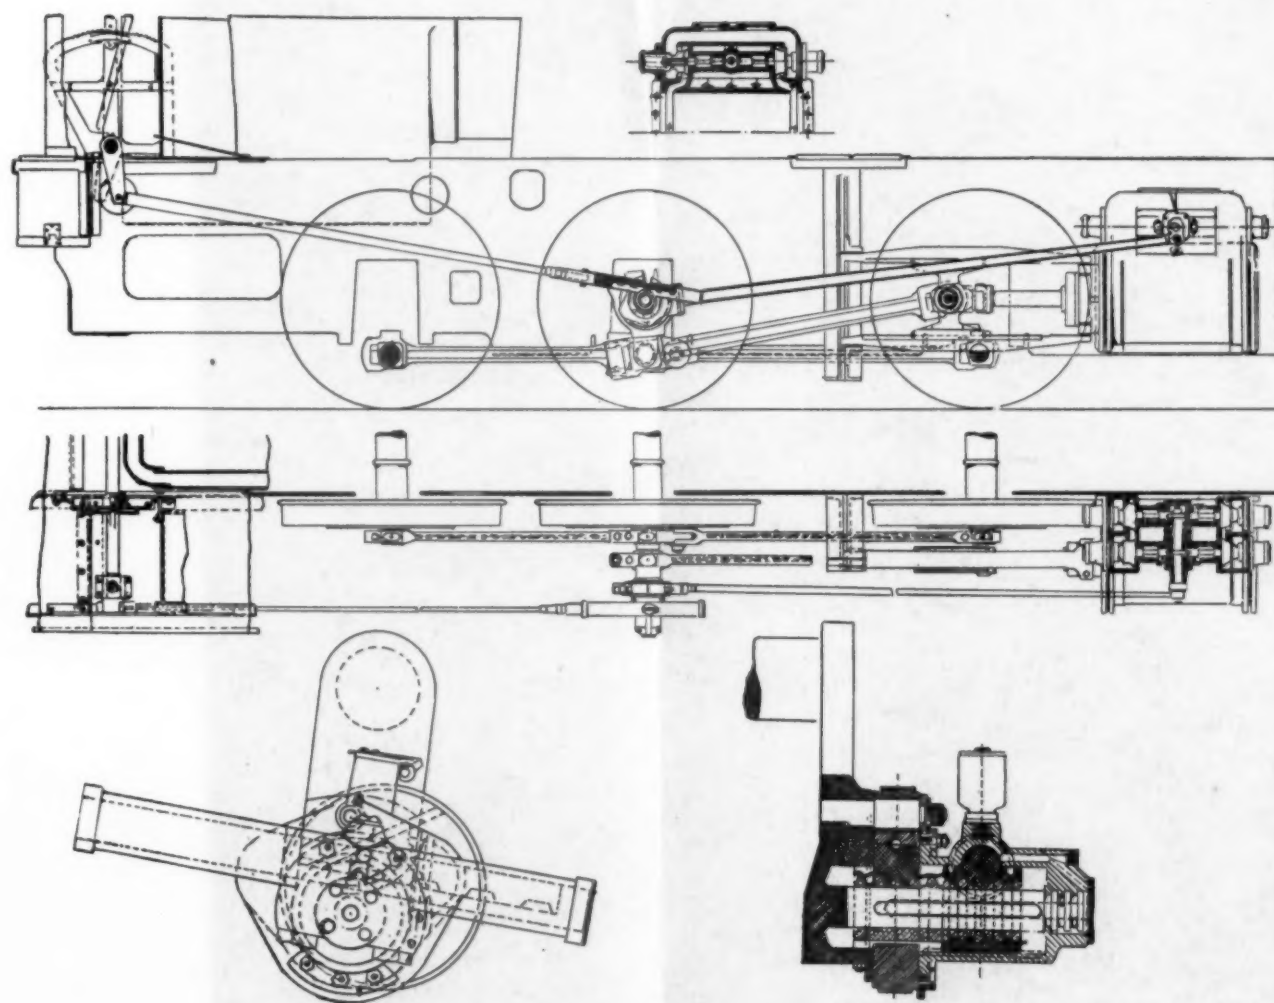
LENTZ VALVES AND GEAR FOR LOCOMOTIVES
